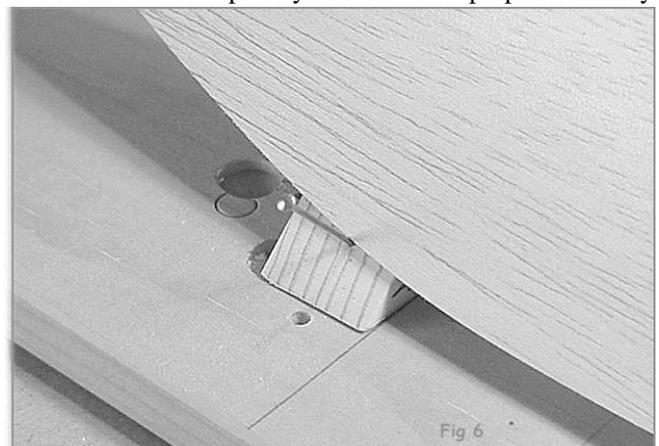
Blade should clear the fixture base by about 1/4" (6 mm).
